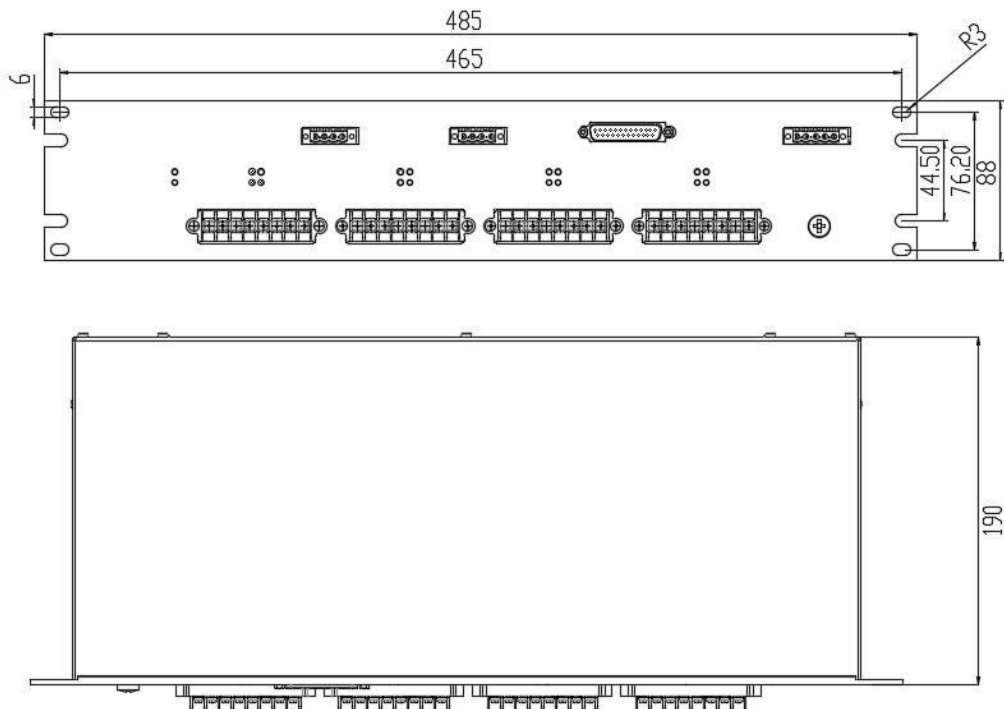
Dimensions and mounting drawing of F-PIC800 multichannel power meter
